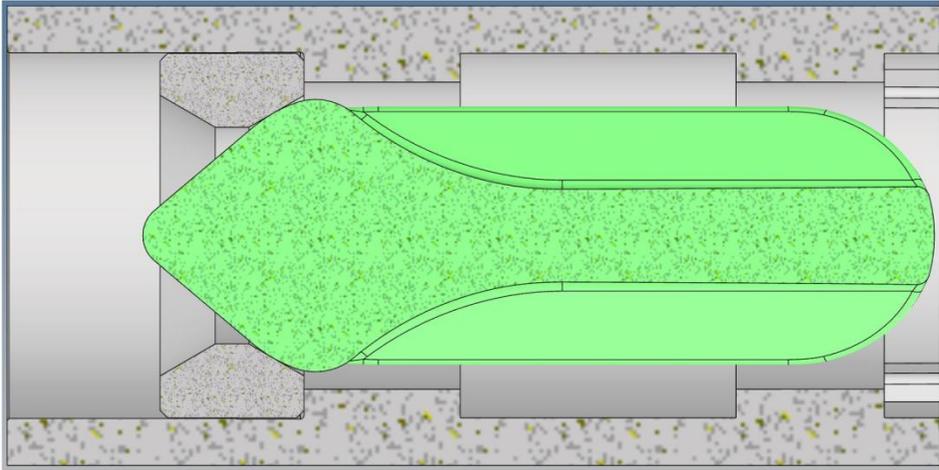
ENGINEERED HYDRODYNAMIC VALVE INSERT DESIGN ITERATIONS USING 3D METAL PRINTING
